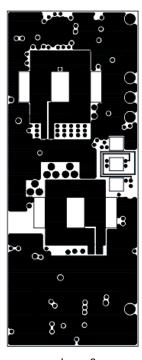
SiP11203 Demonstration Board PCB layers 1-4
